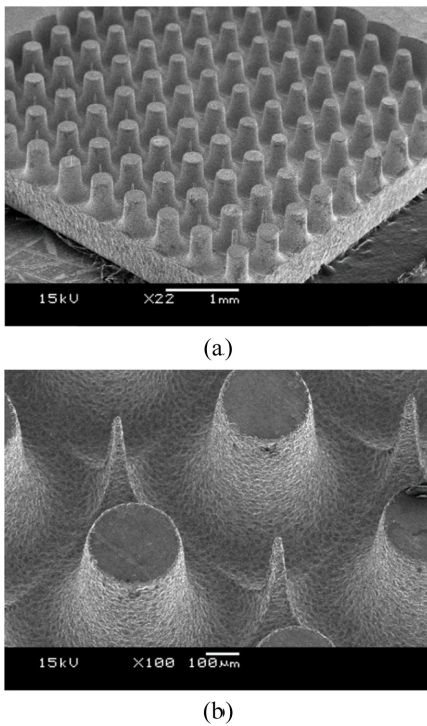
Micro column array machined on a brass steel plate: 10 × 10, 100 cylindrical columns, pitch 630 µm (a) isometric view, (b) enlarged view of a micro column and under-cut area
